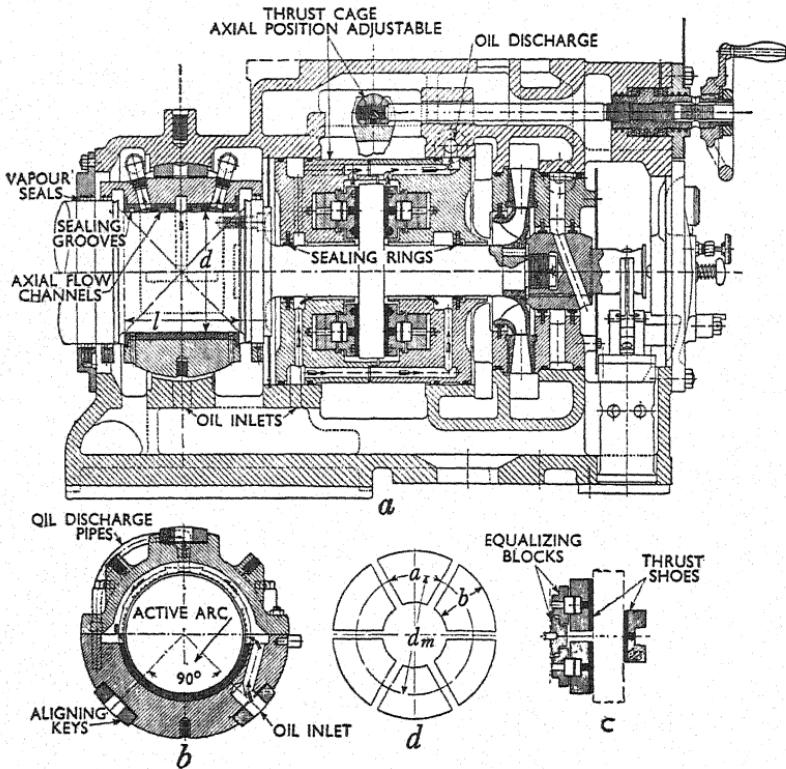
Section through Front Pedestal and Arrangement of Bearings of Typical Steam Turbine
